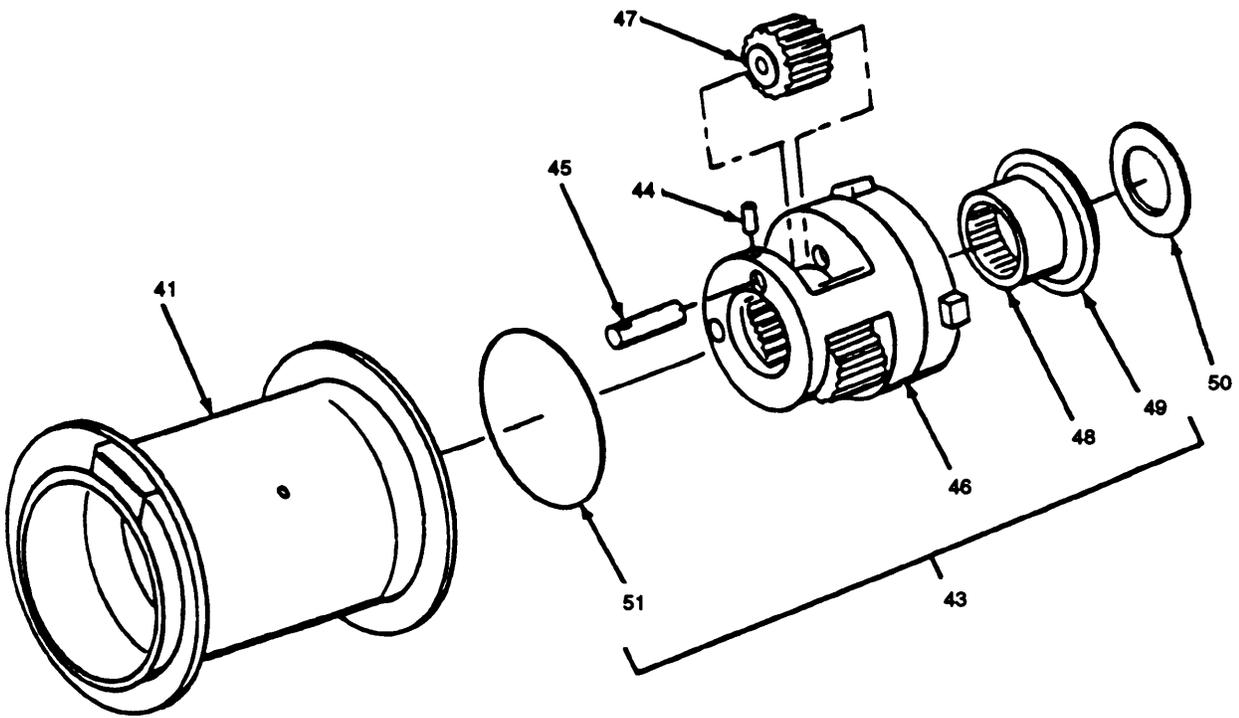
Winch Assembly Model PG-115-043R, Disassembly (Sheet 3 of 5).
